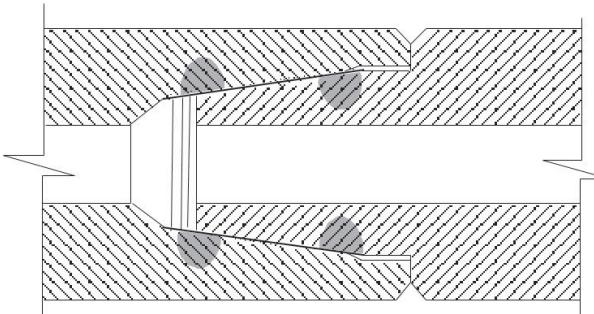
Fatigue cracks in BHA connections occur in the regions of highest tensile stress (shaded above). In drill pipe tubes, most fatigue cracks form in stress concentrations from slip cuts and from internal upsets.
